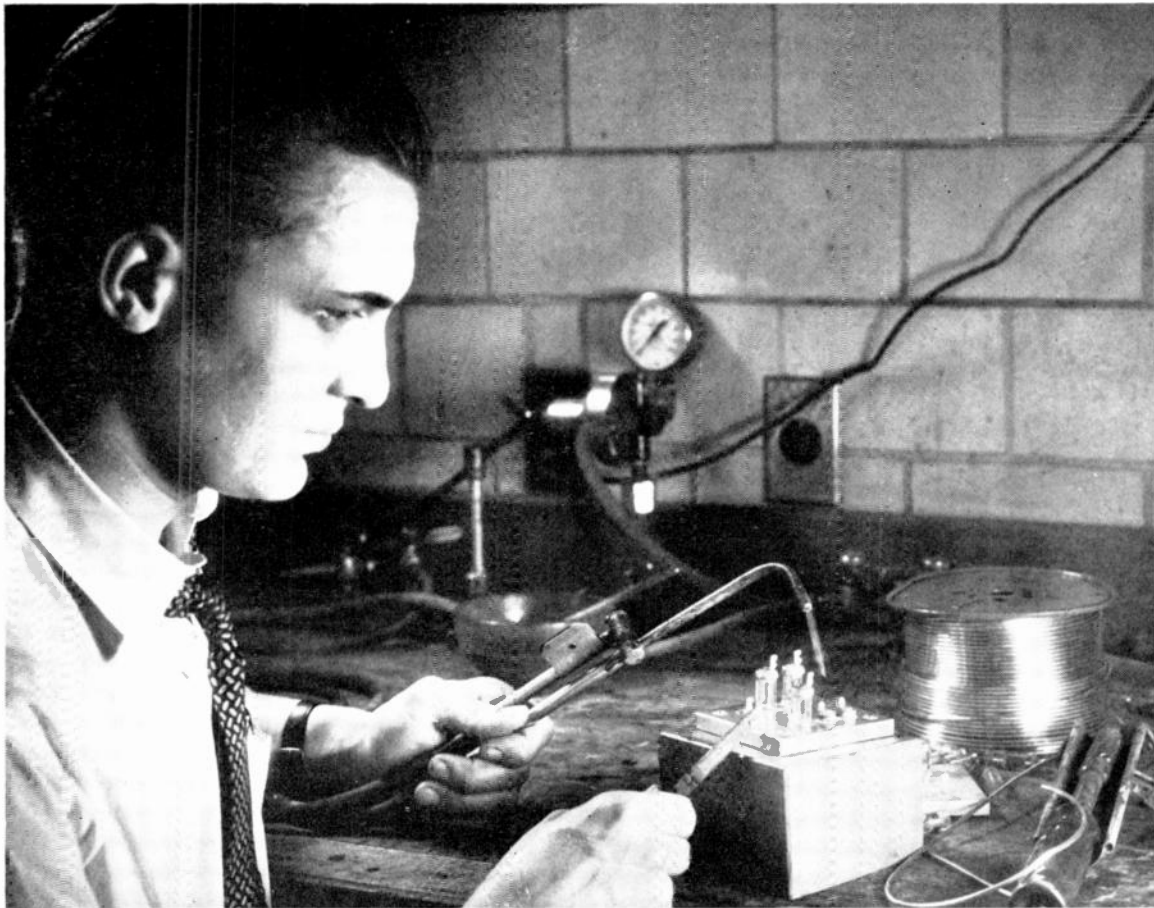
CORNING TECHNICIAN SOLDERING BUSHINGS IN A TYPE OF COVER USED BY UTC FOR TRANSFORMERS
